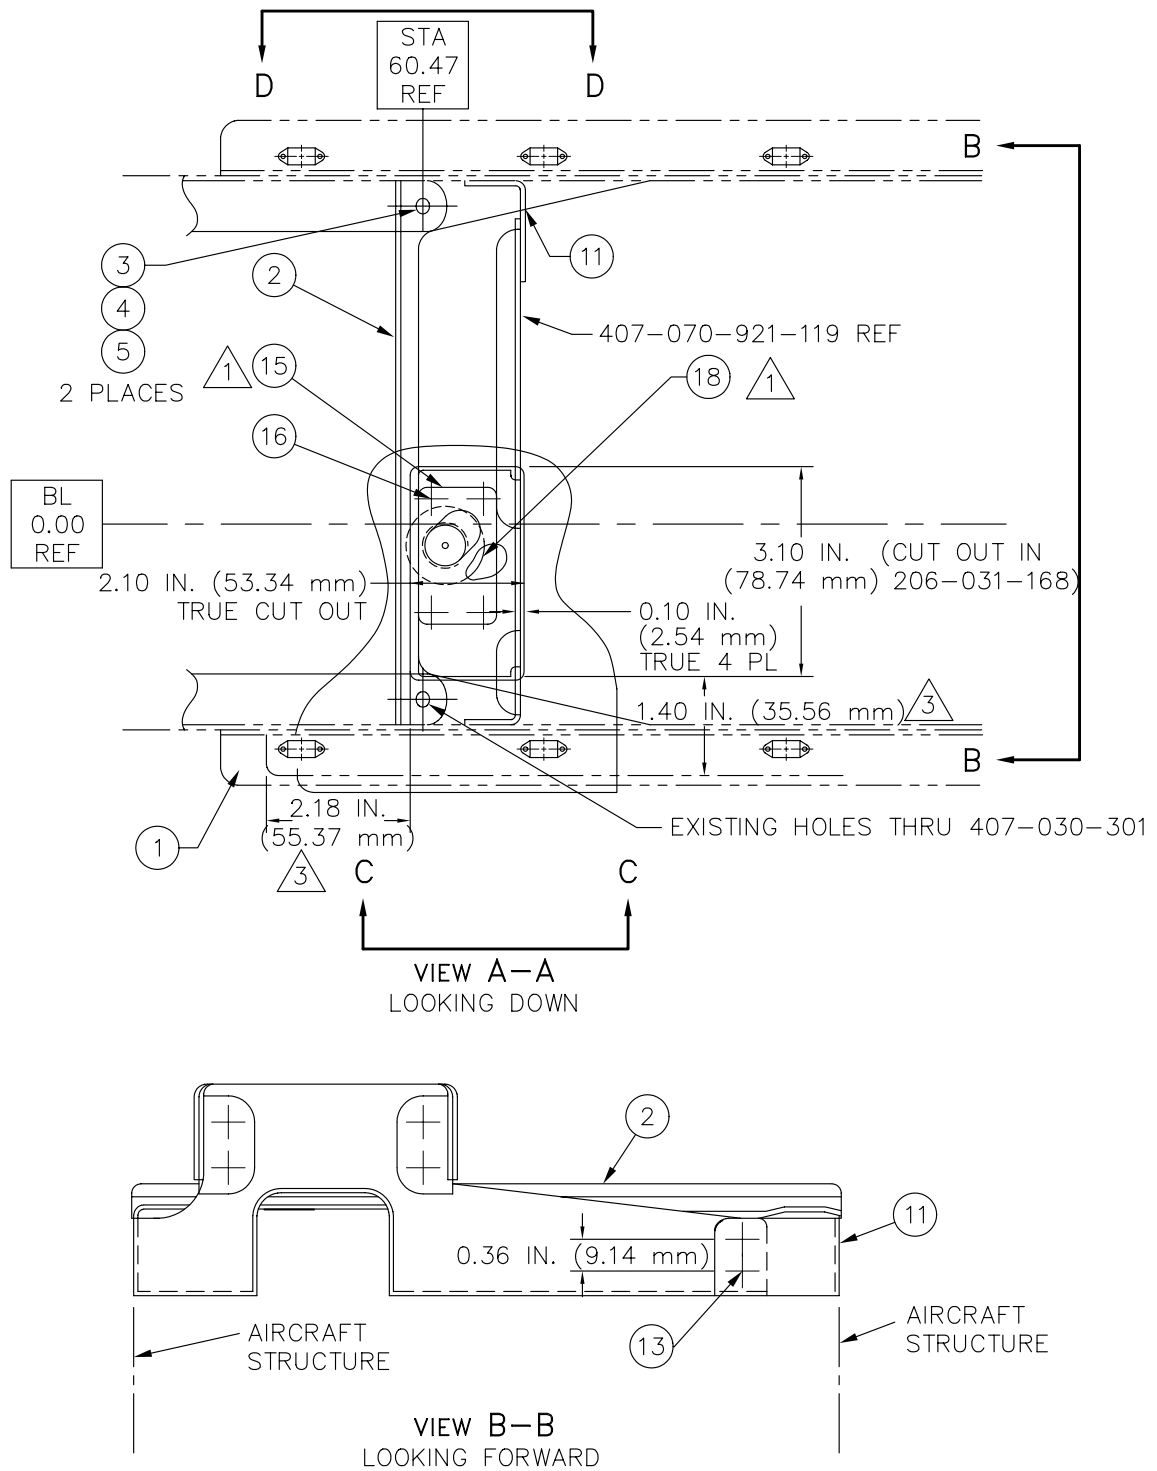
Installation of new support (407-070-921-103) (Sheet 2)
